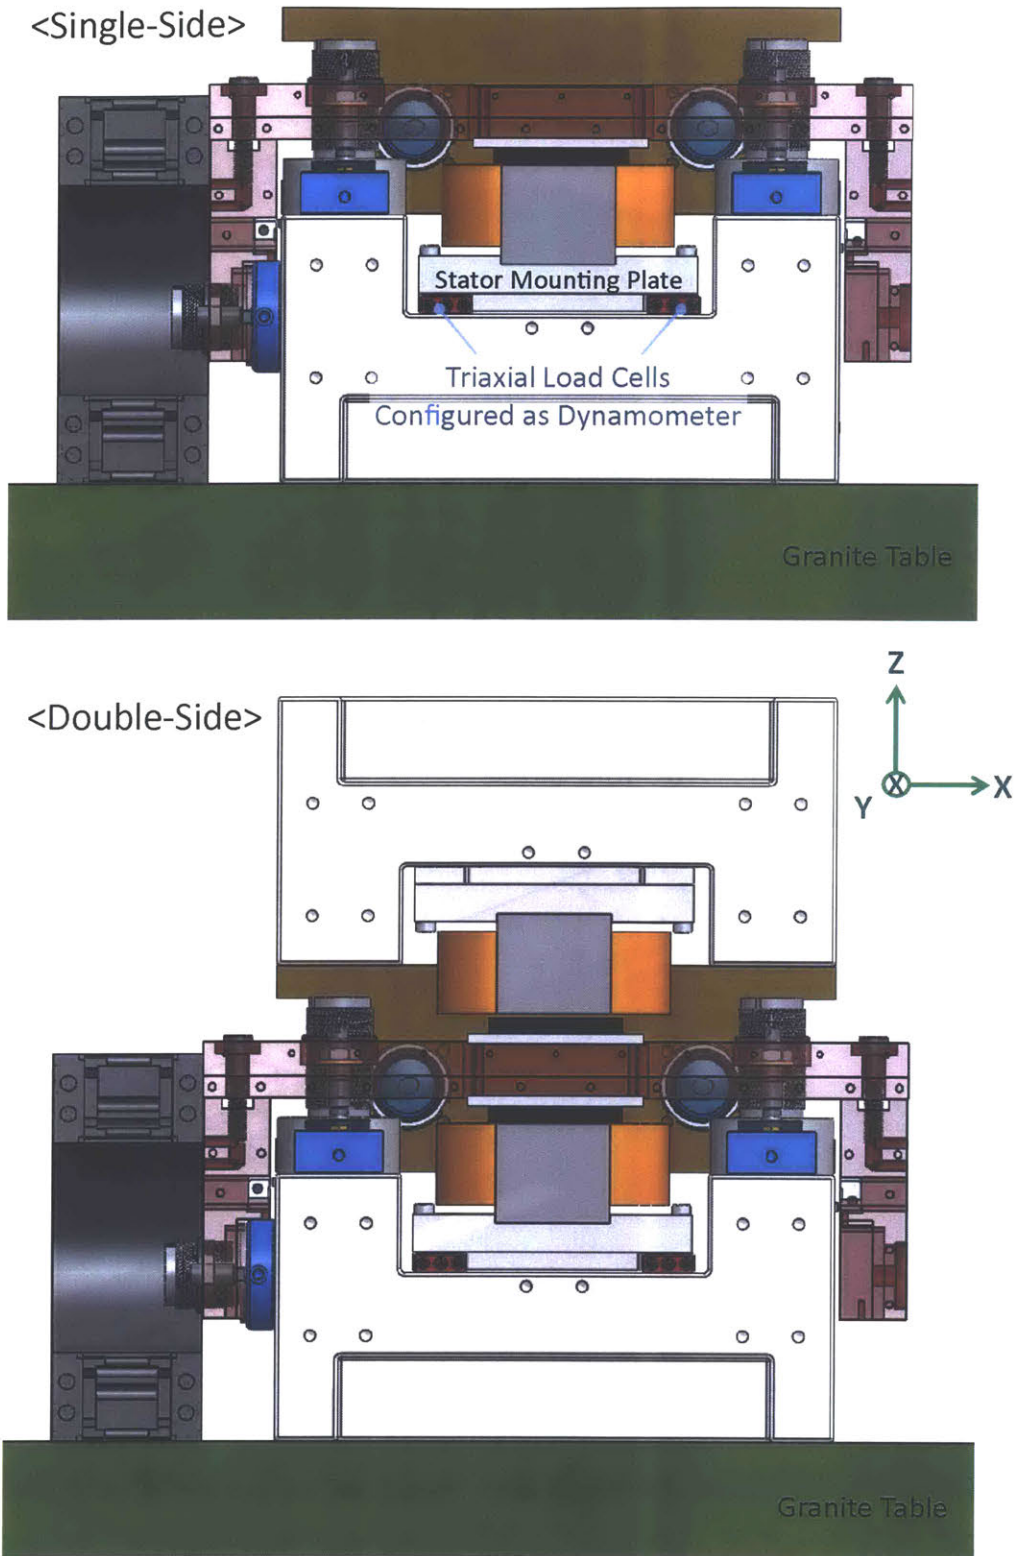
Front views of selected testbed design with our newly-designed fine-tooth Motors both for single-sided (upper) and double-sided (lower) configurations.
